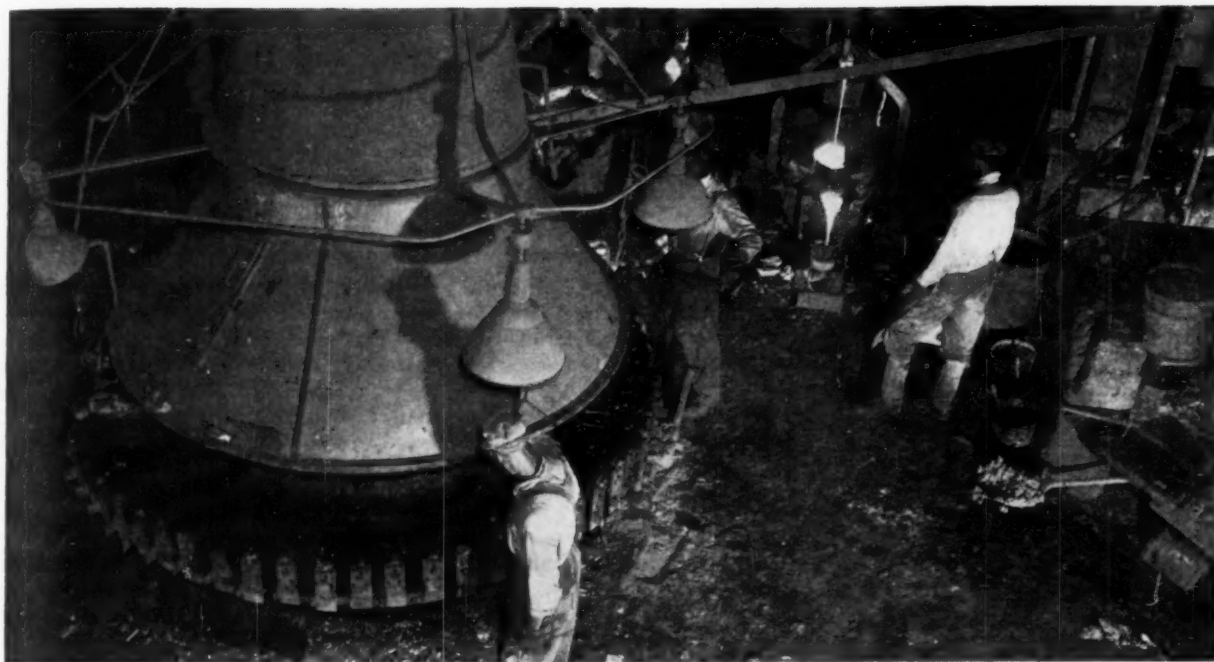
GENERAL VIEW OF BOLT-CASTING UNIT
